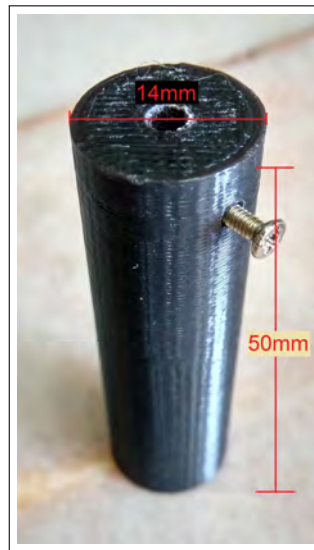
Fabricated Omni wheel's shaft using 3D printer.
